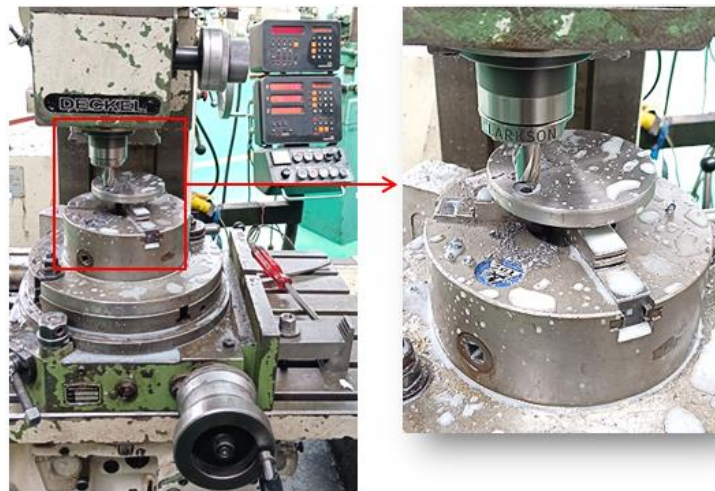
Upper Rotating Die Manufacturing Milling Machine
